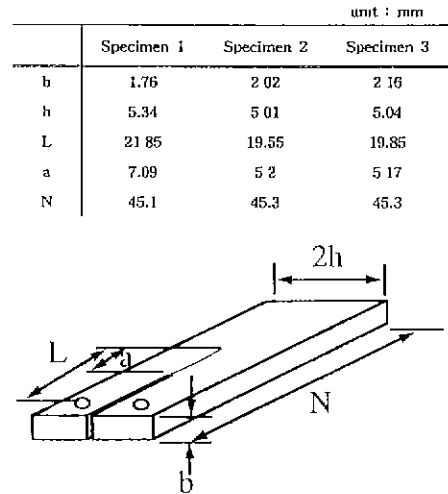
Shape and dimensions of the DCB specimen used. (unit: mm)
